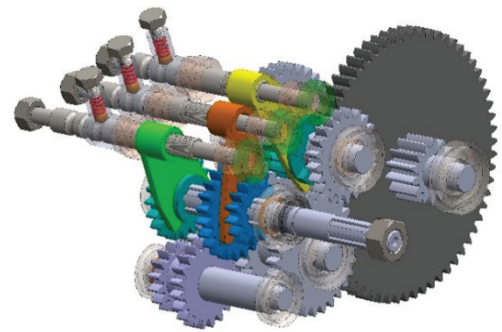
Cad of Gear Shifting Mechanism Gearbox
